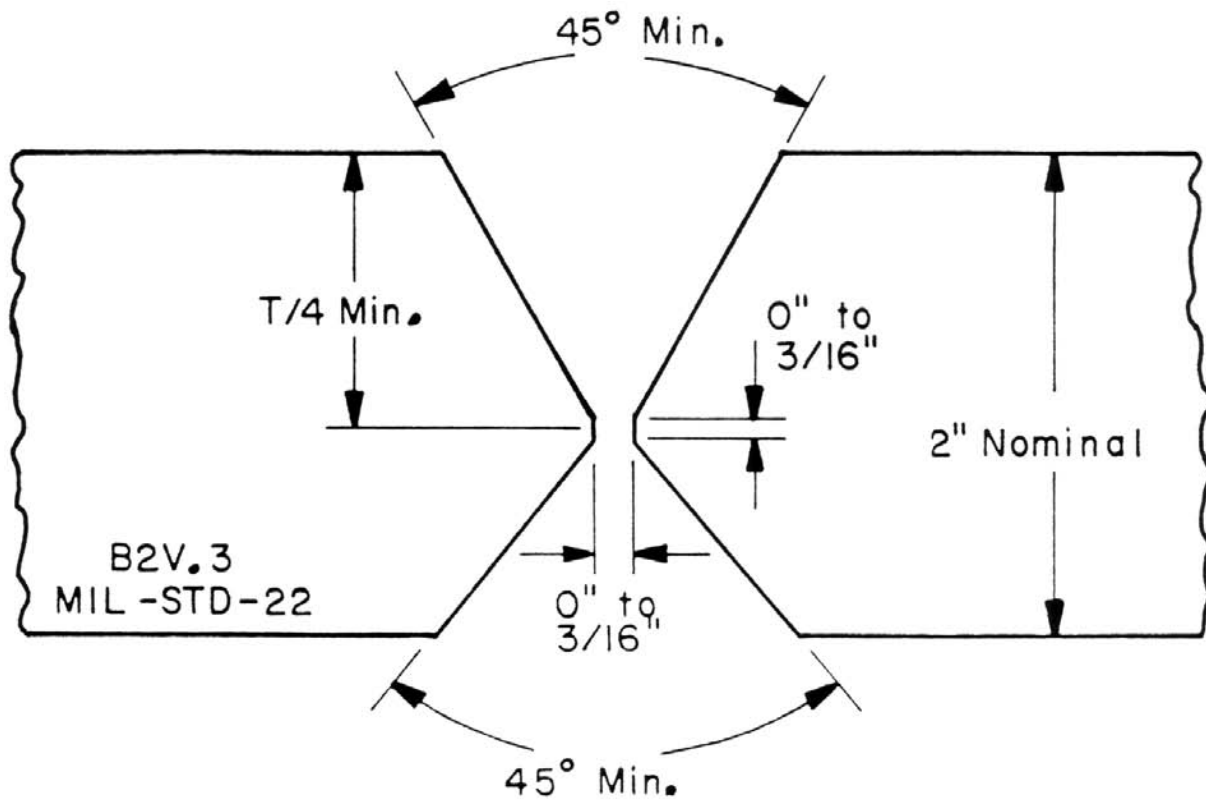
Typical Configuration for Explosion Test Weldments.
